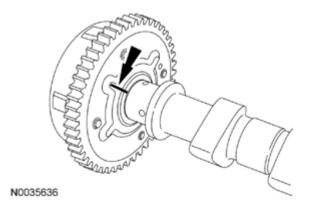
Locating Sprocket And Camshaft Reference Mark Courtesy of FORD MOTOR CO.
